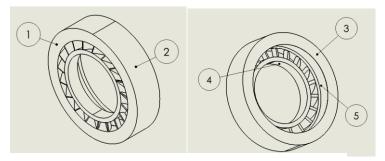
COMPRESSORS' STATORS MACHINED SURFACES
